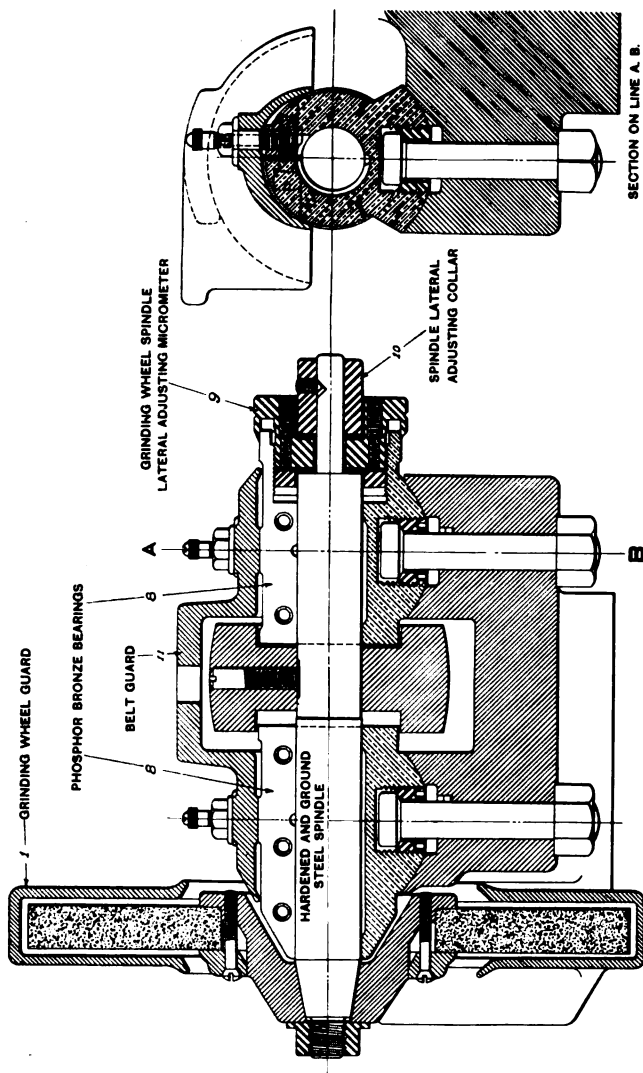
Section Through Grinding Wheel Spindle and Bearings—Universal Machines
